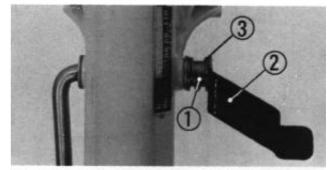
1 Flanged bolt 3 Hook return spring 2 Reverse lock hook
